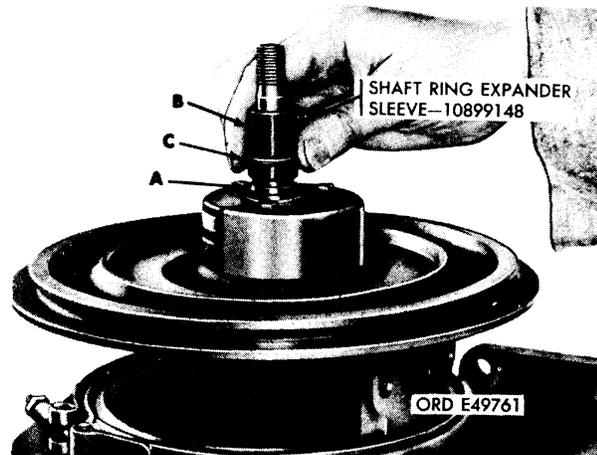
INSTALLING FLINGER SLEEVE AND PISTON RINGS - TURBOCHARGERS 10912638 AND 53591-C-139552.
